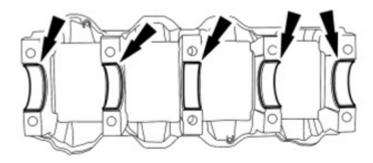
Locating Main Bearings Courtesy of FORD MOTOR CO.
